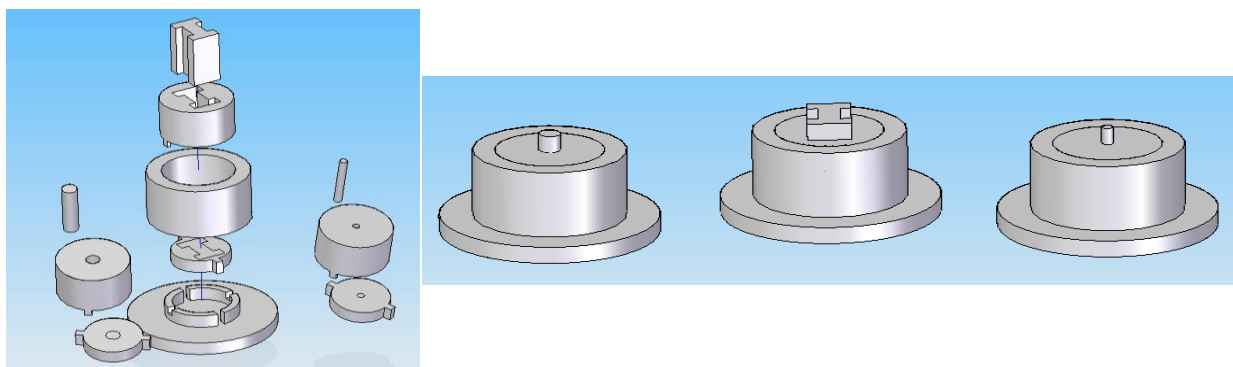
Universal mould, compression (left), tensile (middle), destructive (right)
